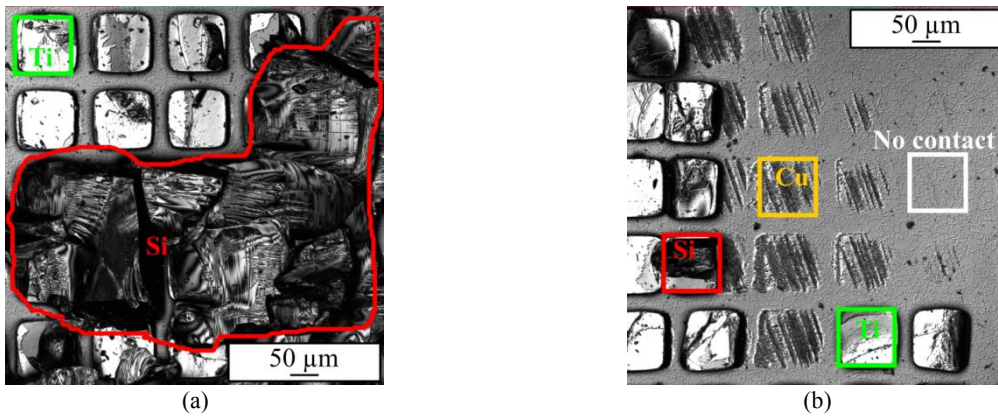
Types of fracture surfaces after shear strength tests on the bottom dies A: Si and Ti fracture surfaces (a); Si, Ti, Cu fracture surfaces and no contact (b)
